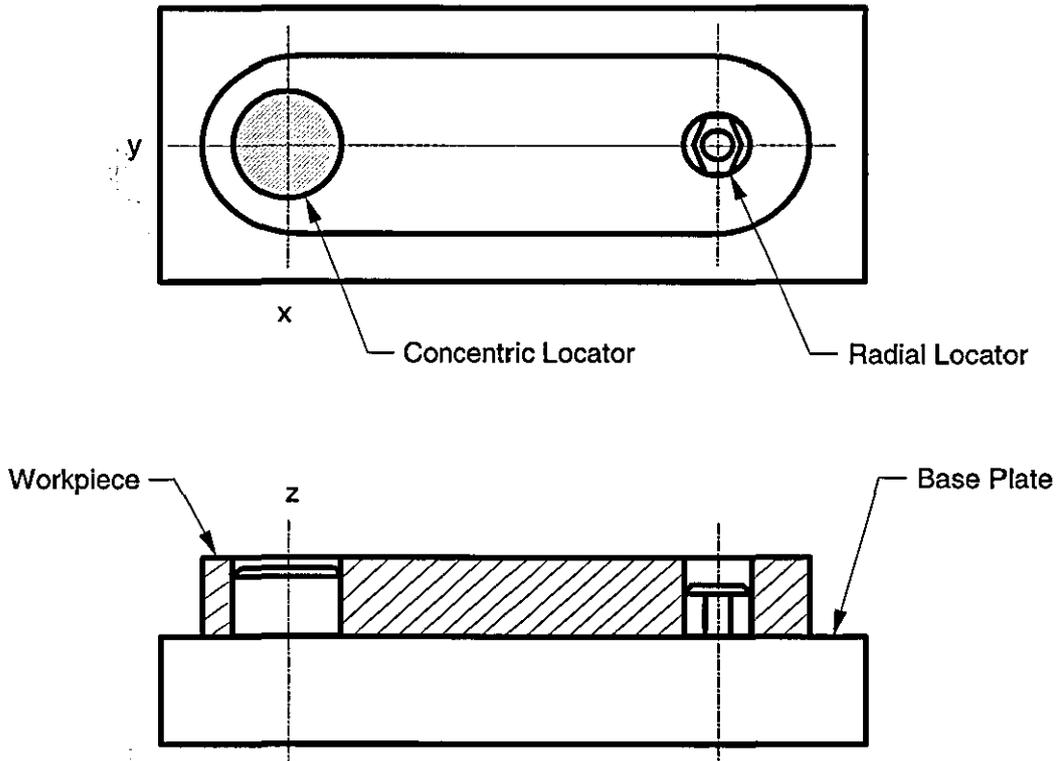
Workpiece Mounted on a Base Plate with Two Locating Pins
